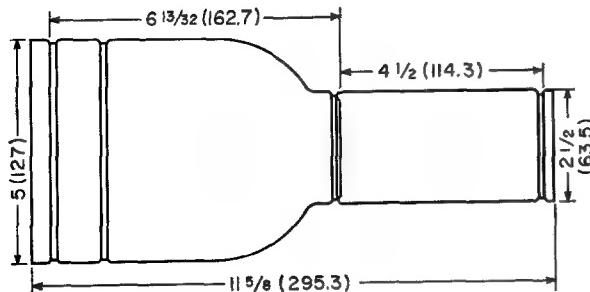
Outside dimensions of the 5-inch (127-millimeter) electric-field-deflection Iatron *Ia10P20-25*.
